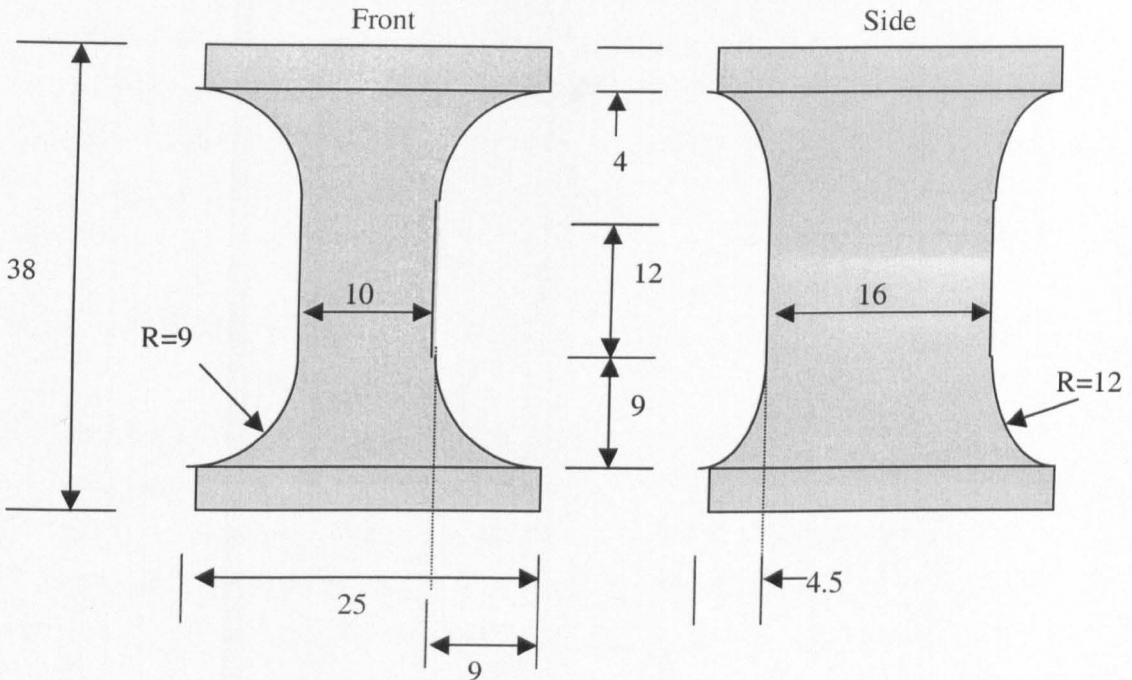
Bonded waistedspecimen. Dimension in mm.
